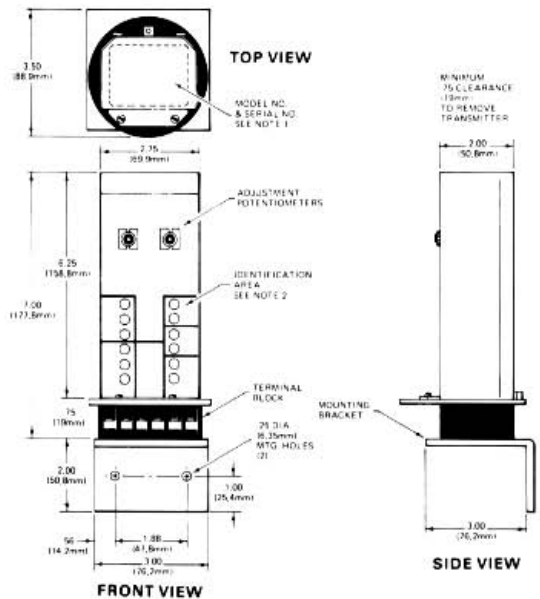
STANDARD UNIT AND UNIT WITH CP OPTION, OUTLINE AND DIMENSION
